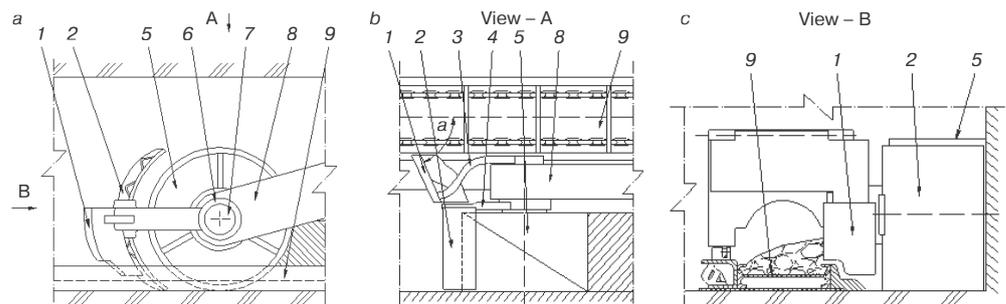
Coal and bladed of rear drum of shearer loader: a — general view; b — top view; c — back view; 1 — blade; 2 — cowl; 3 — bracket; 4 — support bracket; 5 — shearer drum; 6 — hub; 7 — spider; 8 — drive housing; 9 — conveyor
